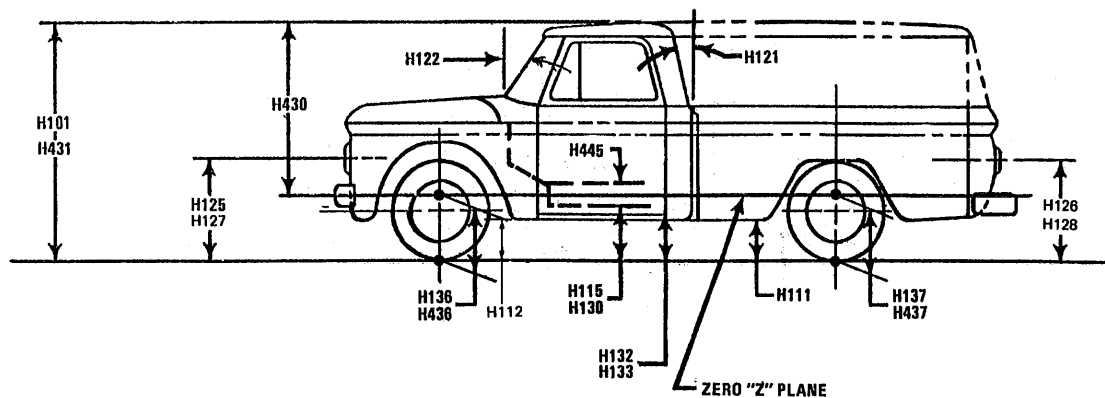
EXTERIOR DIMENSIONS, HEIGHT—TRUCK
